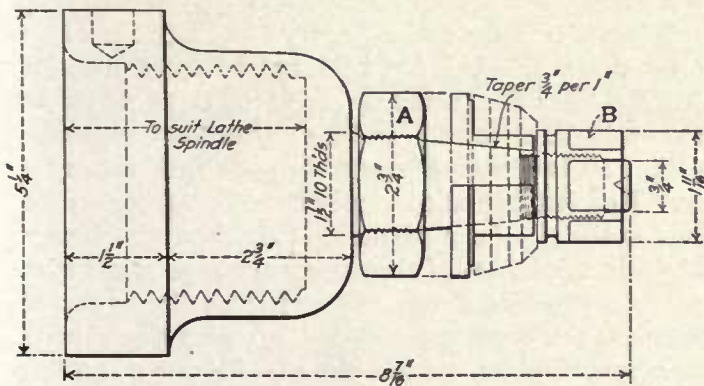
Expanding Mandrel for Turning Piston Rod Packing.
